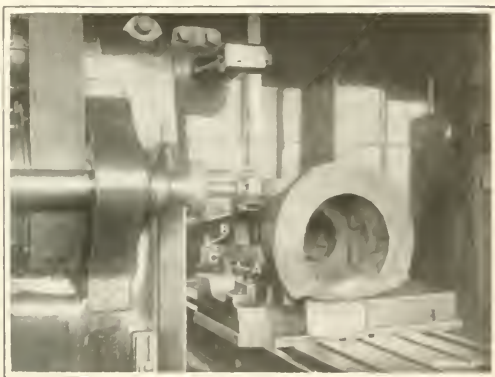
Milling Bearings for Gib and Plate that hold Cutter-slide in Place
